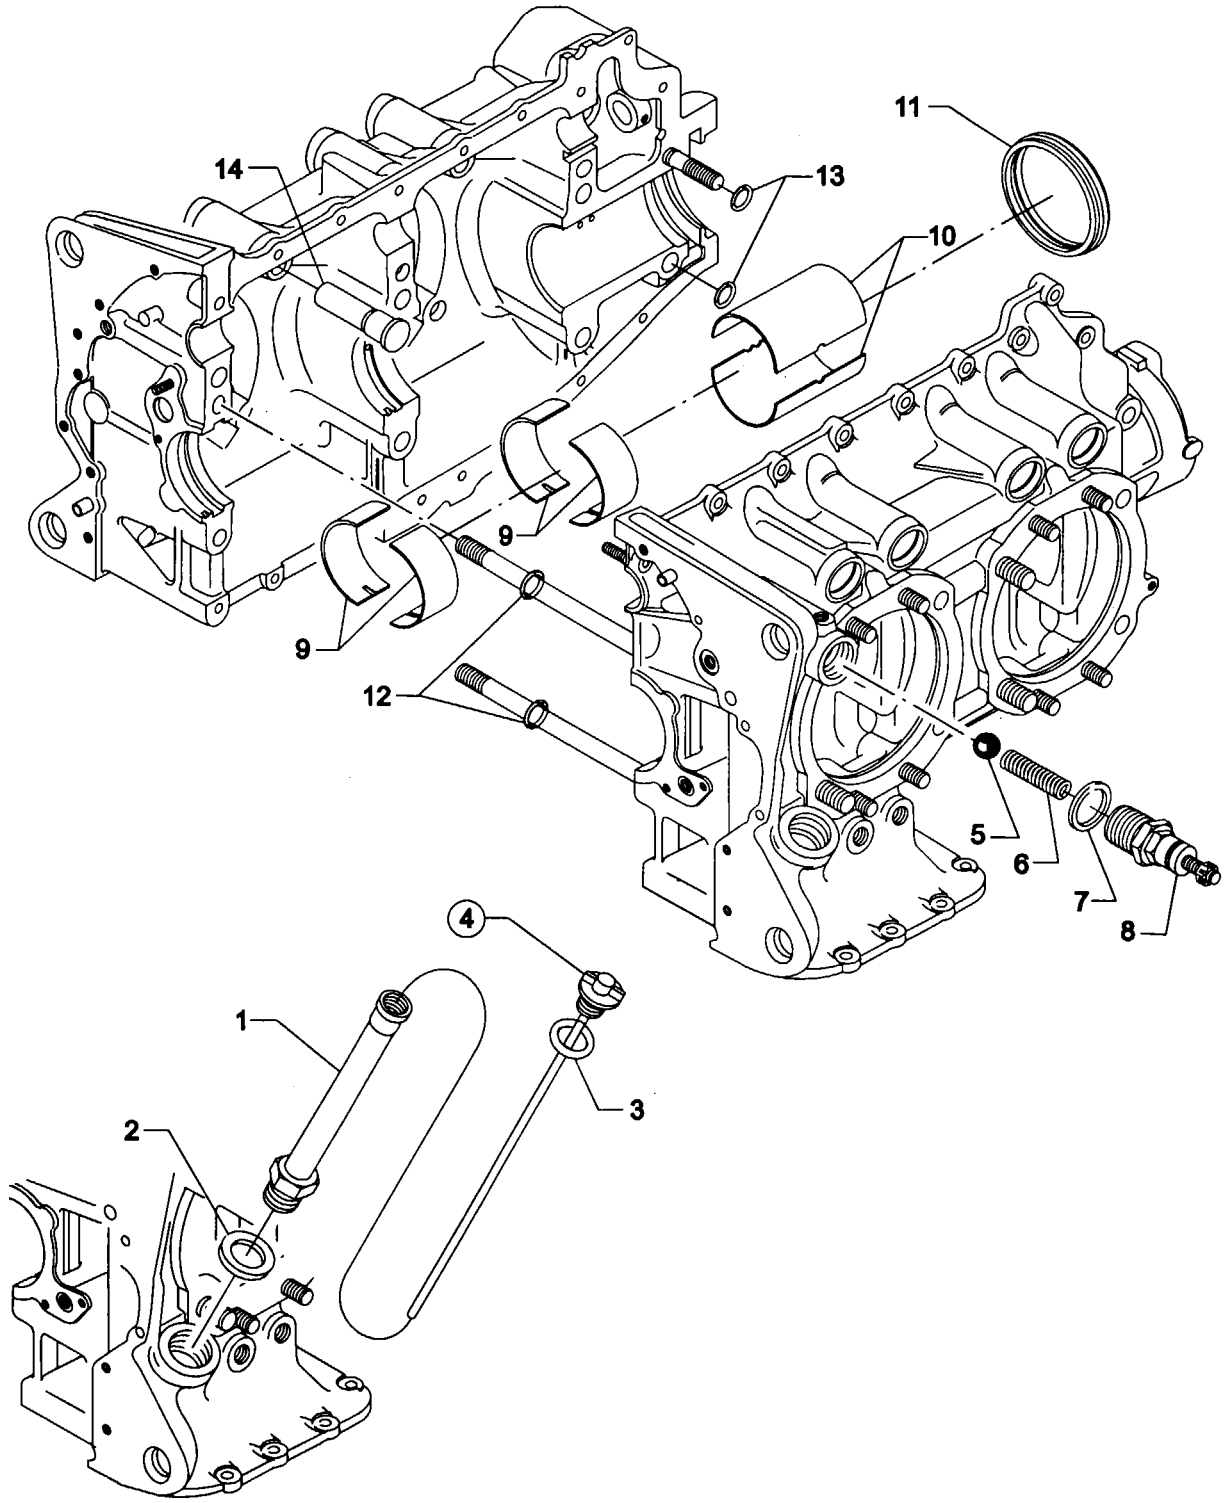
OIL LEVEL GAGE ASSEMBLY AND CRANKCASE RELATED PARTS
